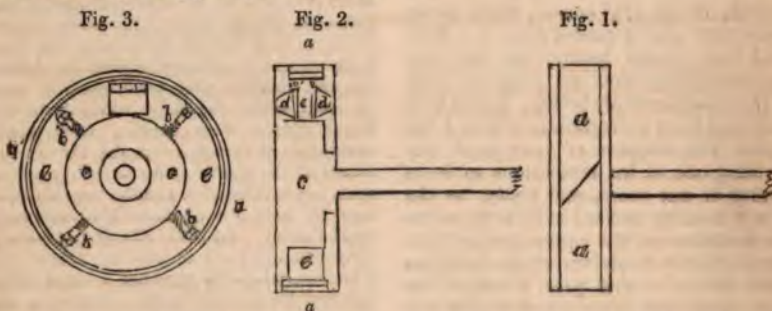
, in the accompanying drawing, is a side view of said piston for a horizontal engine. Fig. 2, is a vertical section through its middle, and fig. 3, a view of the interior, the front plate being removed: *a, a*, are hoops, or flat rings, of steel, or other metal, one within another, divided so as to allow them to adapt themselves by their elasticity to the interior of the cylinder; *b, b*, fig. 3, are set screws which are intended to keep the segments of the interior hoop, when divided into segments, in place, they are tapped into the hub, or centre *c, c*, of the piston.
